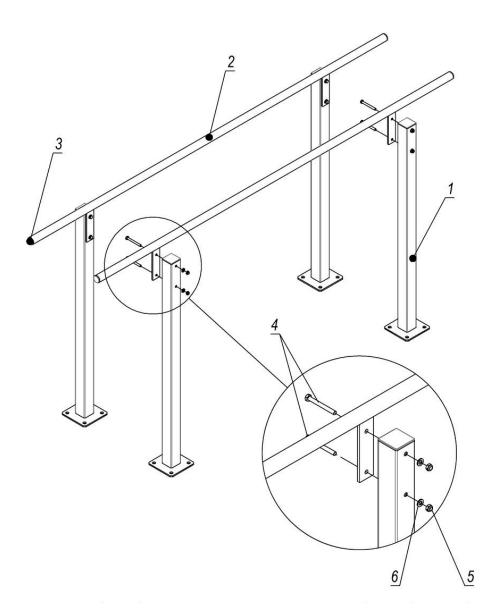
Assembly scheme (Identical assembly scheme for KF902.11, KF902.12, KF902.13, KF902.14, KF902.16, KF902.17, KF902.18, KF902.19, KF902.21, KF902.24, KF902.25, KF902.26, KF902.31, KF902.51)
